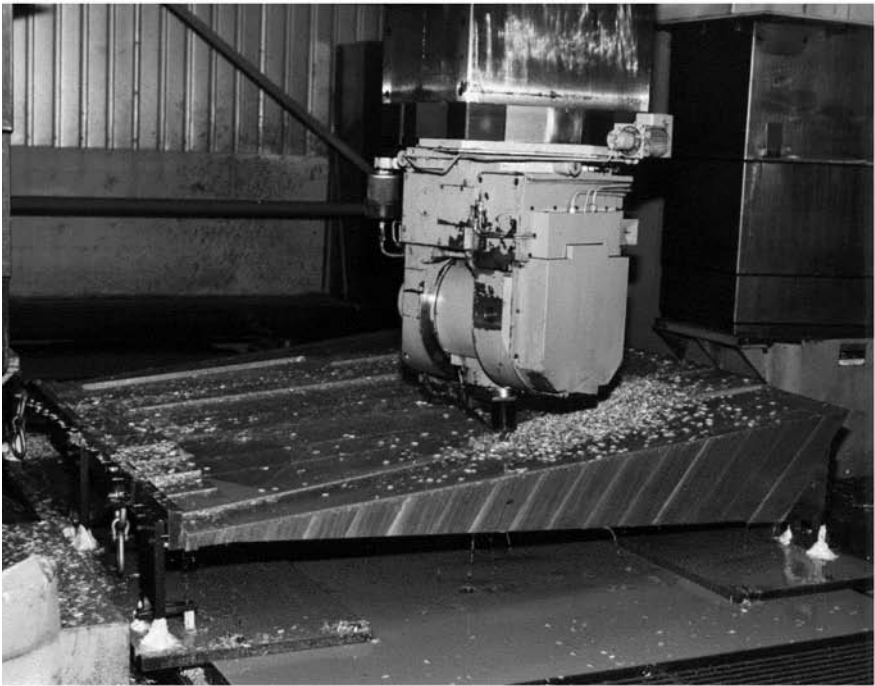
Machining substructure spar mandrels and filler blocks. Photo source: The Boeing Company
